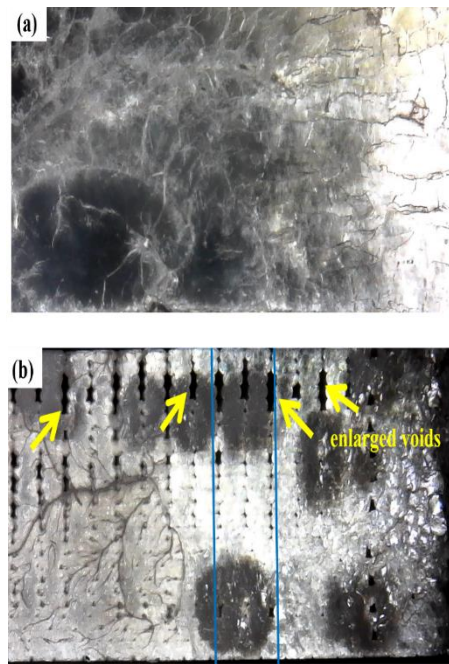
Digital micrographs of the fracture surface of tensile specimens: (a) compression molded; and (b) 3D printed specimen.
